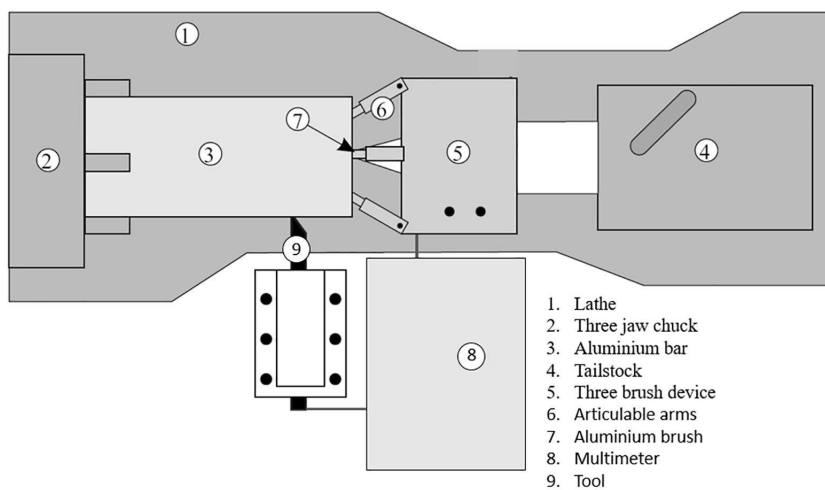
Schematic of the tool–workpiece thermocouple system (top view) [16].
